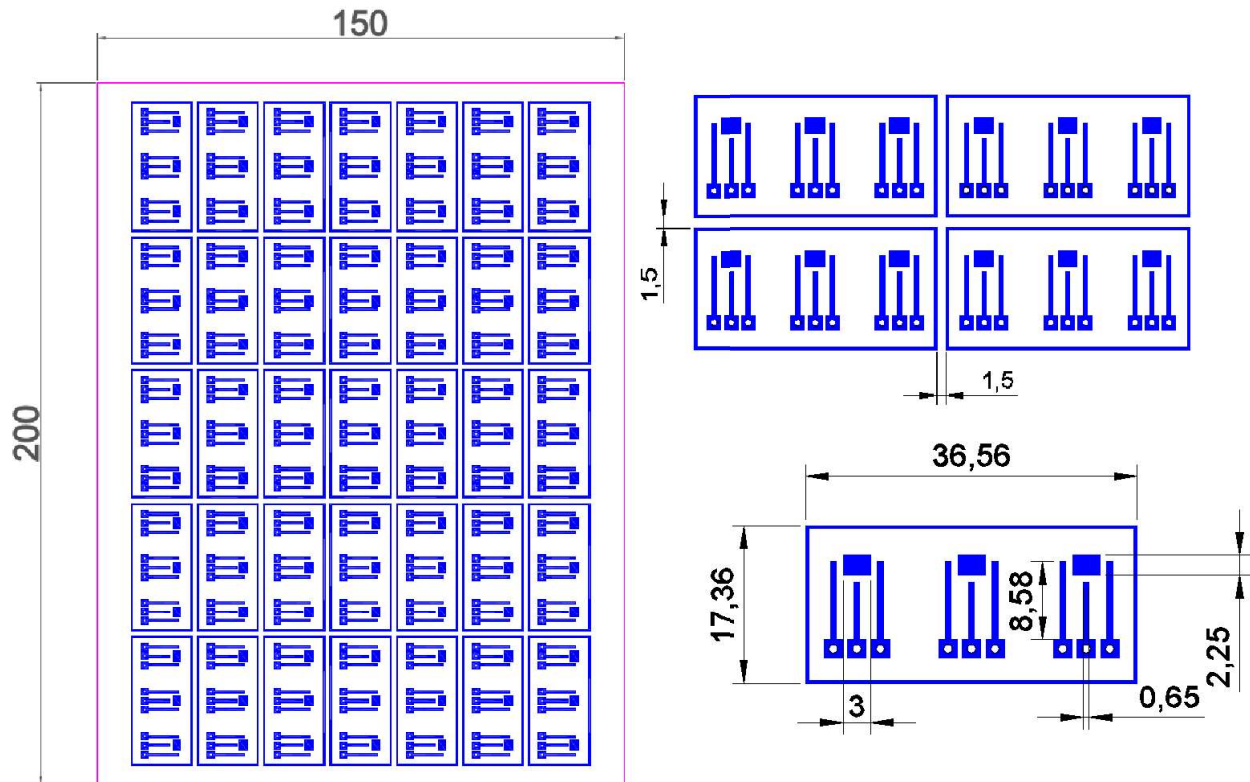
Hard mask Mask design using AutoCad 2015 (mm). One can see that there is a separation between the PCBs and the edge of the copper board this is because at the edge of the printed circuit boards the Photoresist tends to be much thinner than in the middle and, therefore, more error prone. The separation of the PCBs in between themselves was 1,5 millimeters so that upon cutting there was a sufficient degree of freedom.
